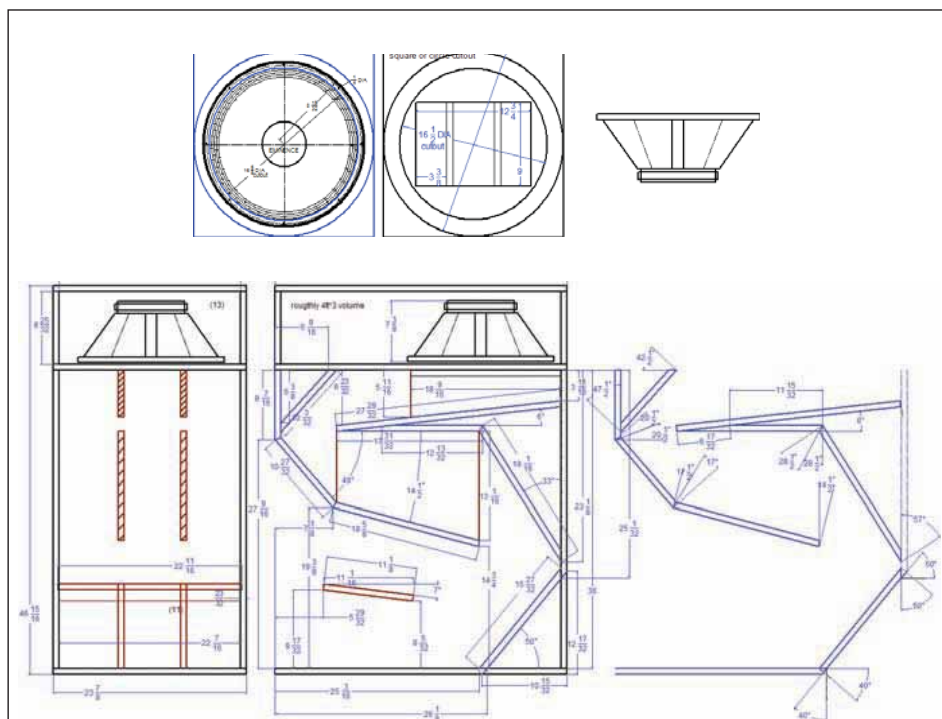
A 30Hz horn design using 180° duct bends. Left is front view, middle is side, and right is horn duct showing the 180° angles. The driver baffle mounting board is shown at the top.
